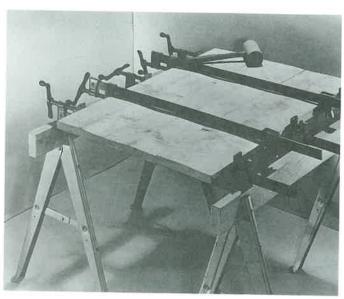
Alternate bar clamps on top and bottom of assembly. Use a mallet to position boards which slip out of place. (*Franklin International*)
